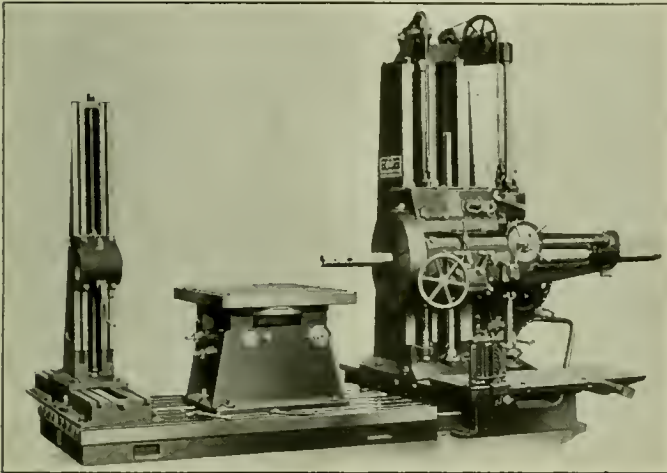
Front View of Machine Showing Large Face Plate, Standard Spindle, Bed Plate and Outer Support
